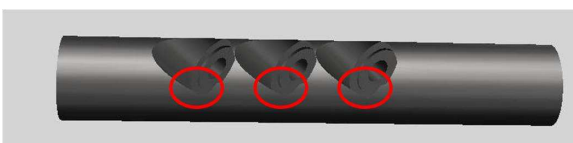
Fatigue cracks initiated at notch of boat
